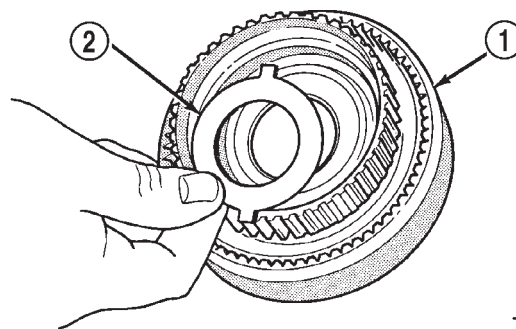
Positioning Thrust Plate On Front Annulus Support
